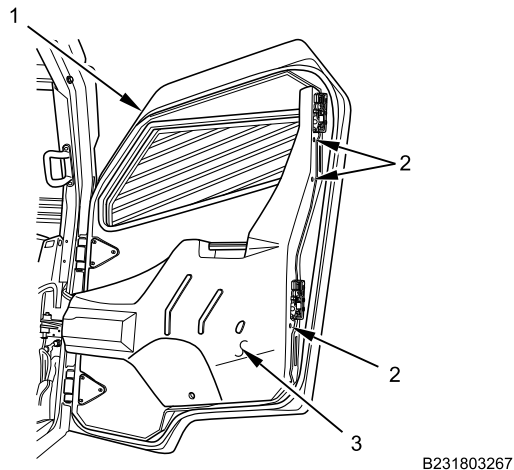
Cabin Door Trim Panel Fasteners Installation.
